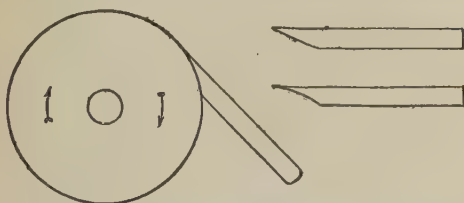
shows cross-section drawings of one knife-blade which has been incorrectly sharpened and one which has been correctly sharpened. After the grinding is completed the sharpening of the knife-blade or other wedge-edge tool is finished on an oilstone.
